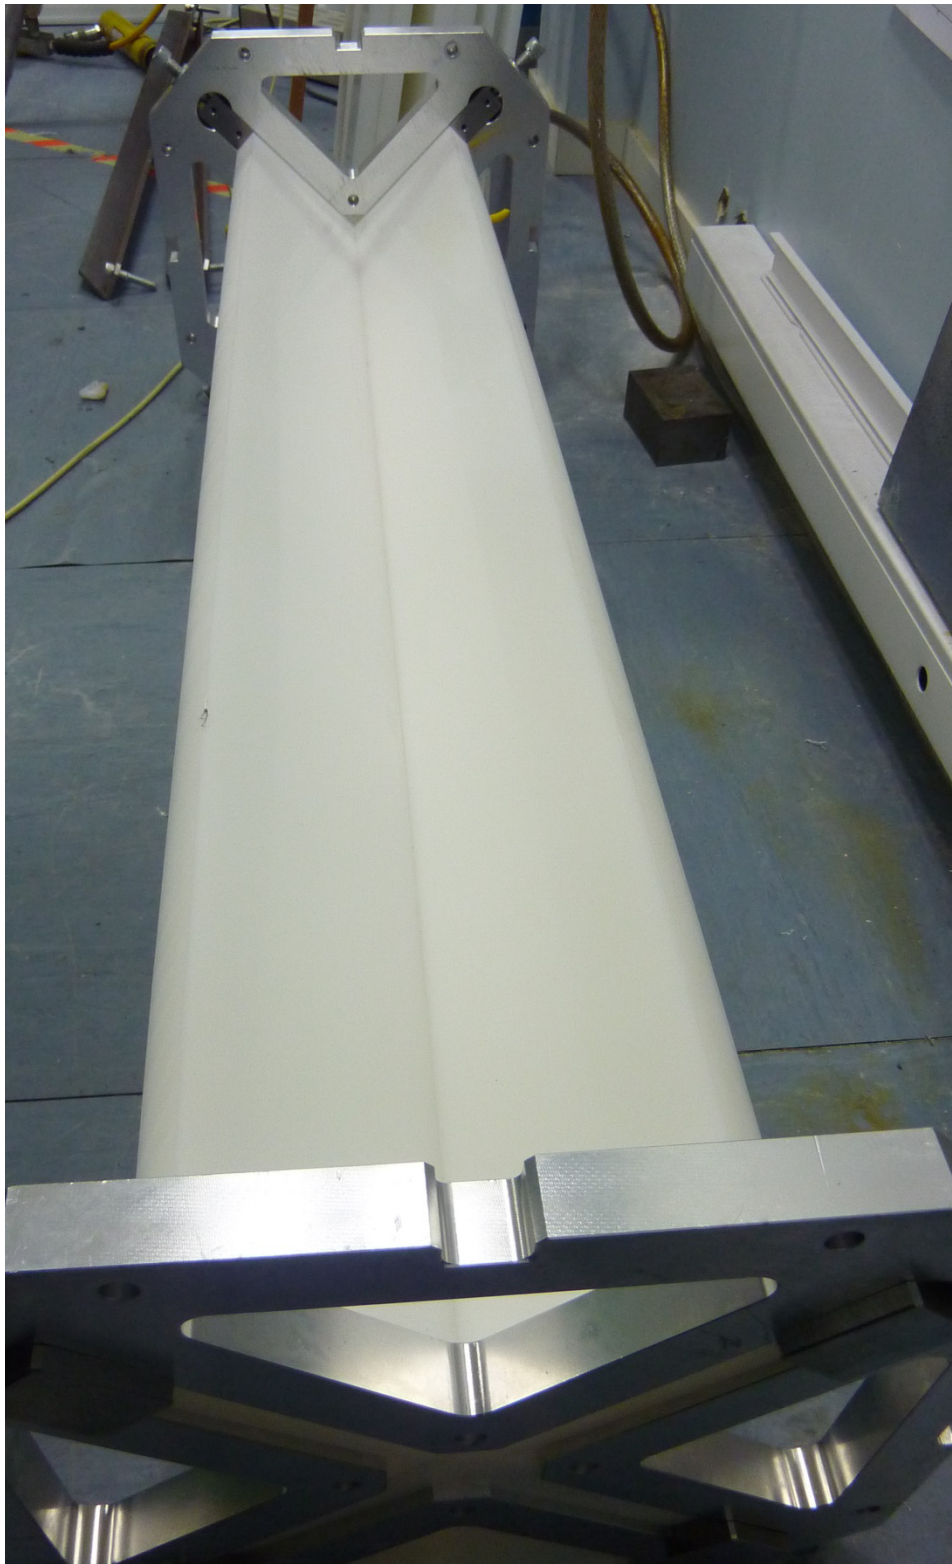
25mm thick HDPE sheet assembled in cruciform/T-joint welding fixture.
